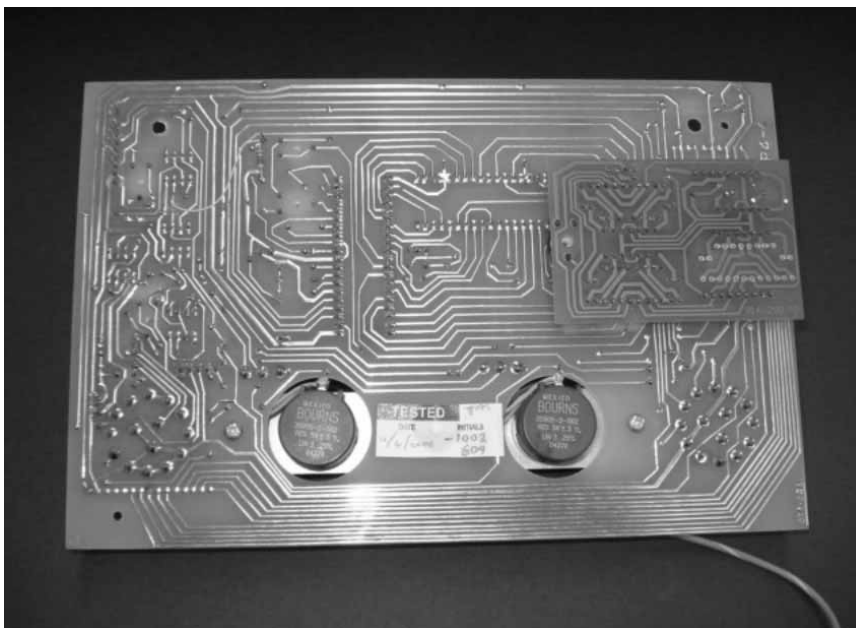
Main PCB rear view showing the linearization PCB for the model PFP7/C.
